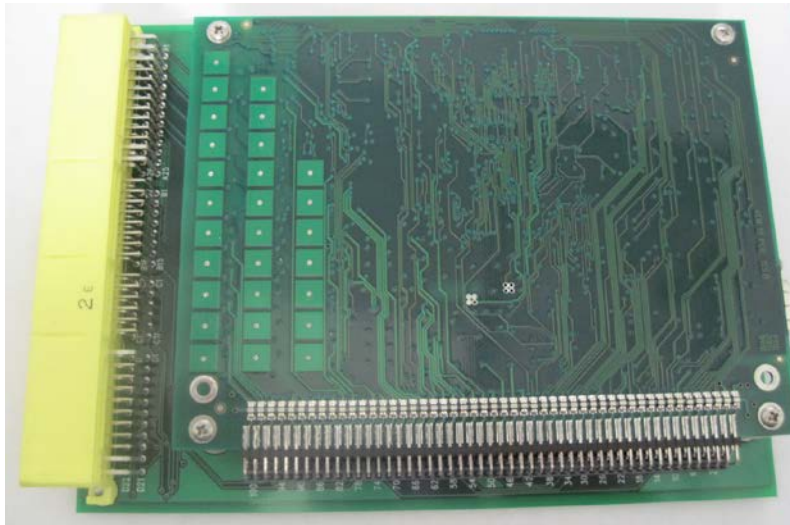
Top View of Circuit Boards Showing Four Mounting Screws
